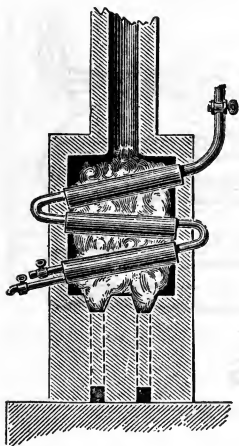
,658.—The first water tube boiler. Built by John Blakely; patented 1766. *It consisted of*, three water pipes inclined alternately, connected at the ends by bent tubes so that the steam formed in the boiler rises to the upper part to supply the engine.
